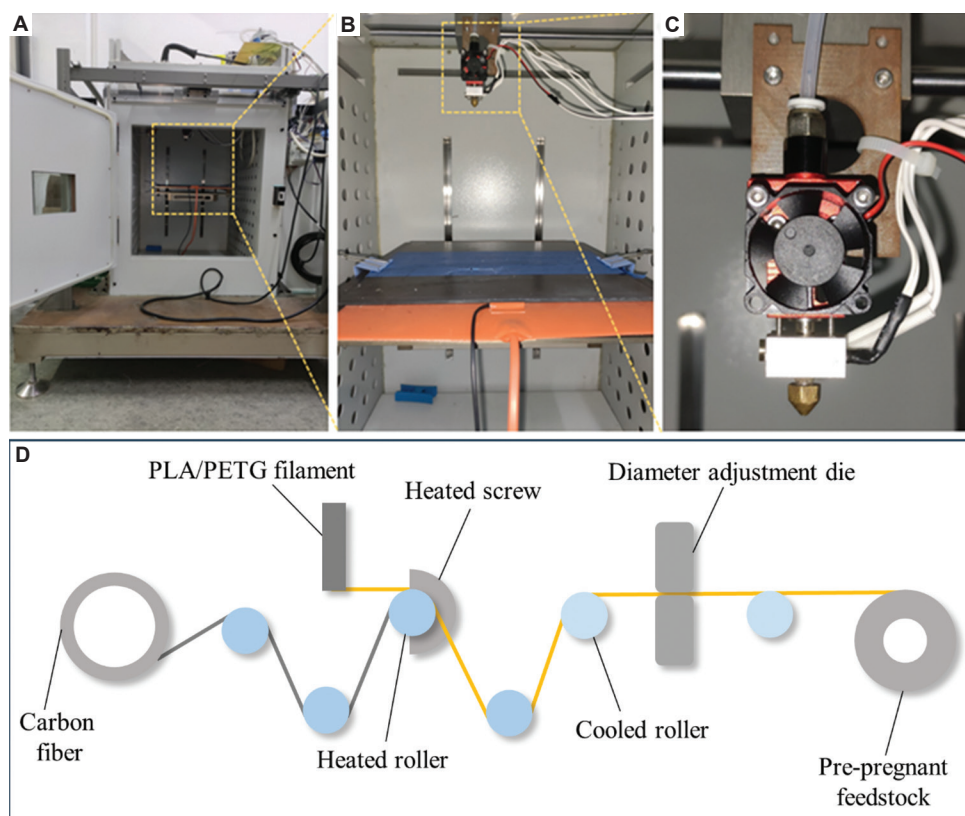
Modified fused filament fabrication printer equipment for additive manufacturing green parts. (A) The overall structure of the equipment. (B) Printing platform and print head. (C) Print head details. (D) Schematic diagram of the procedure for fabricating pre-pregnant feedstock.
